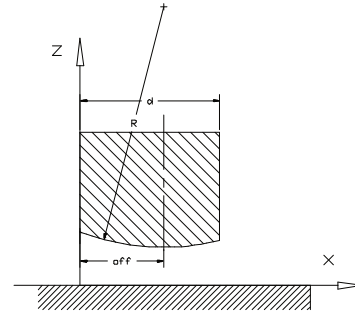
Piston ring geometry: d – ring axial height, R – radius of the ring surface, O_{ff} – offset of the ring sliding surface
